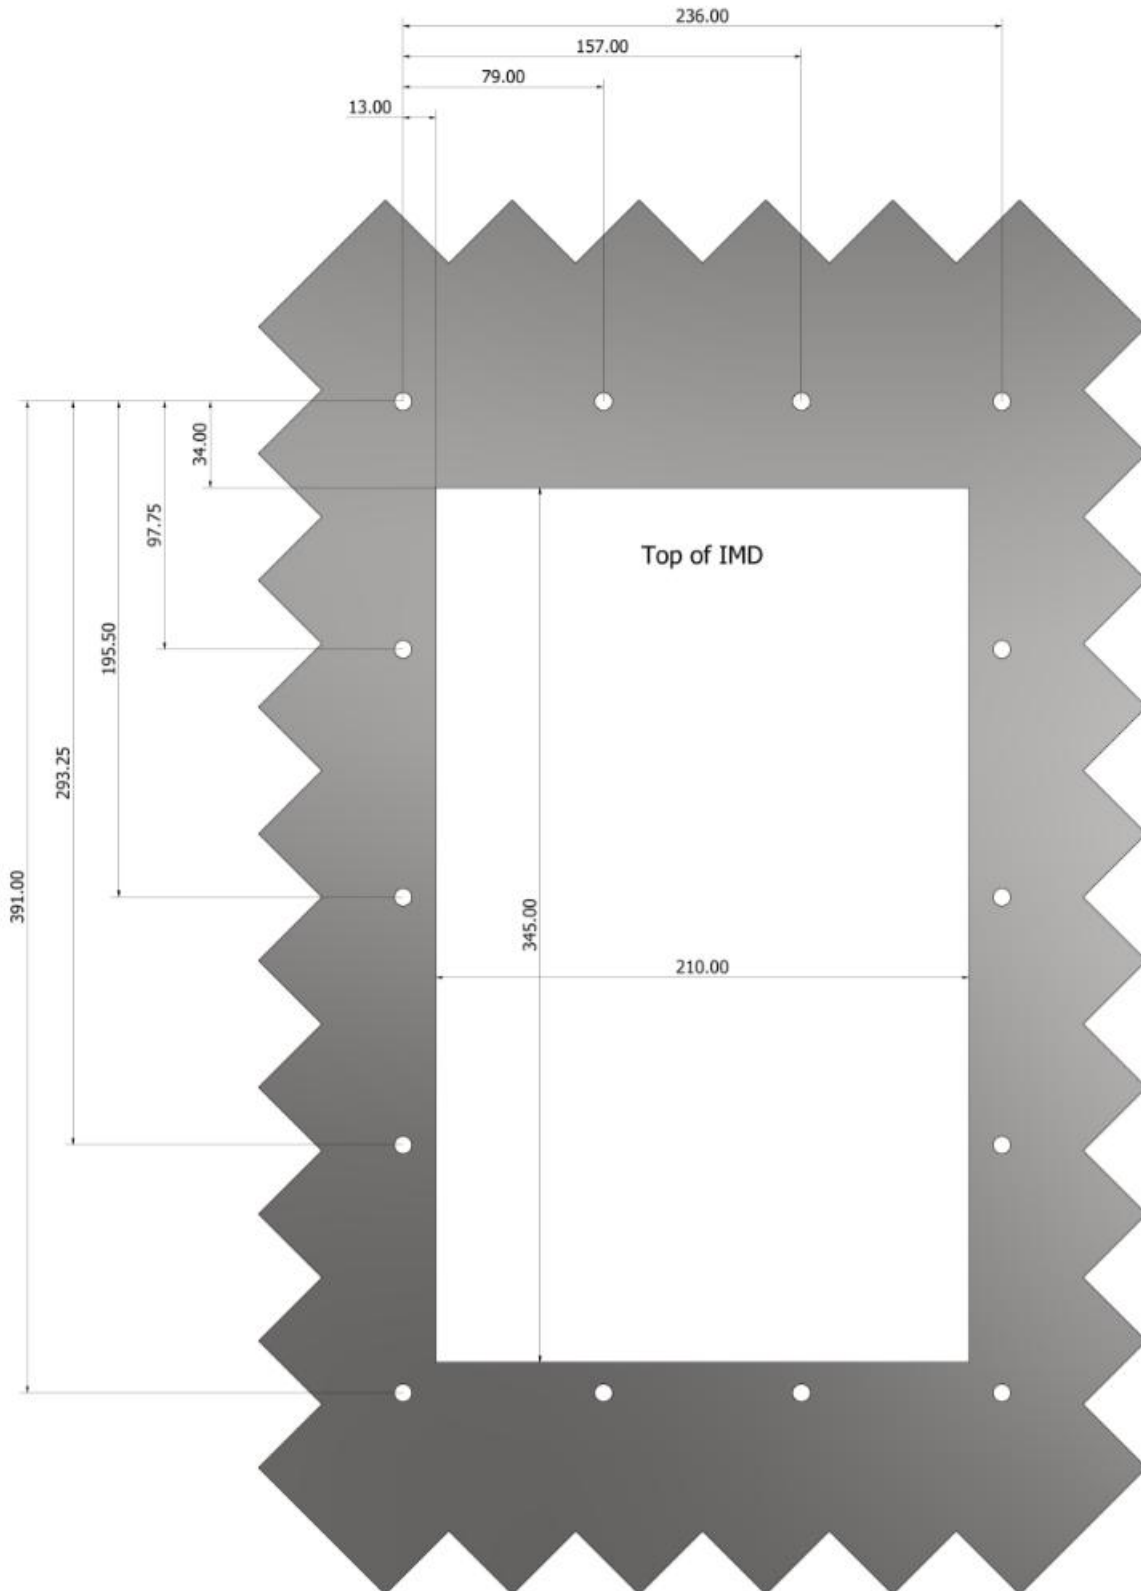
Cabinet cut-out drawing for IMD 122 图 9 IMD122 变桨柜开孔图
